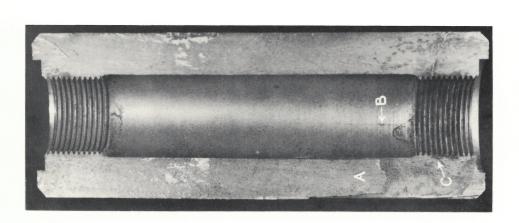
Failure of Jib Tie-Bar of Tower Crane
